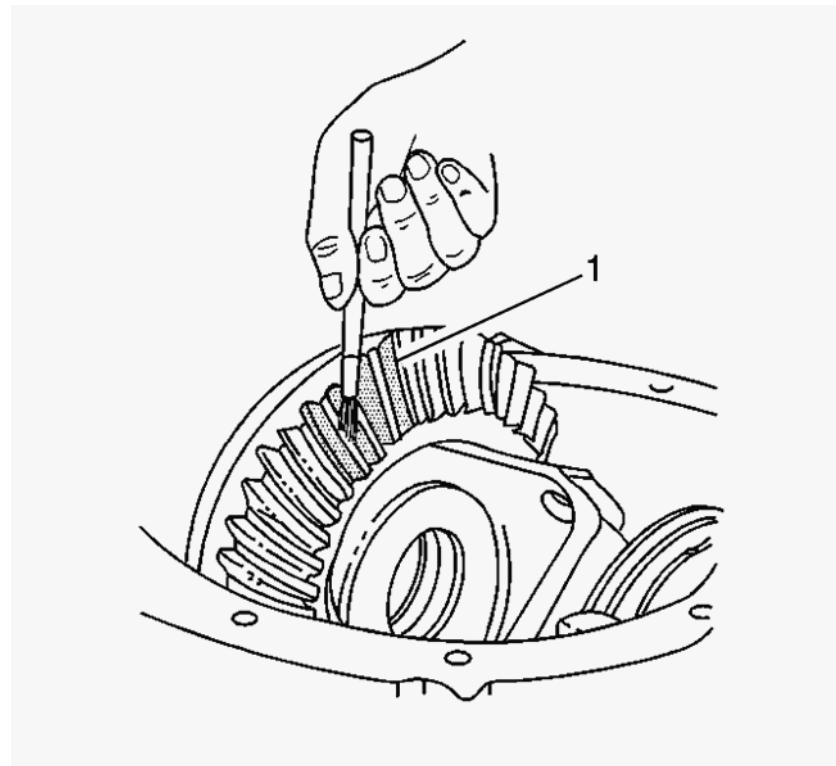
Applying Gear Marking Compound To Ring Gear Teeth
